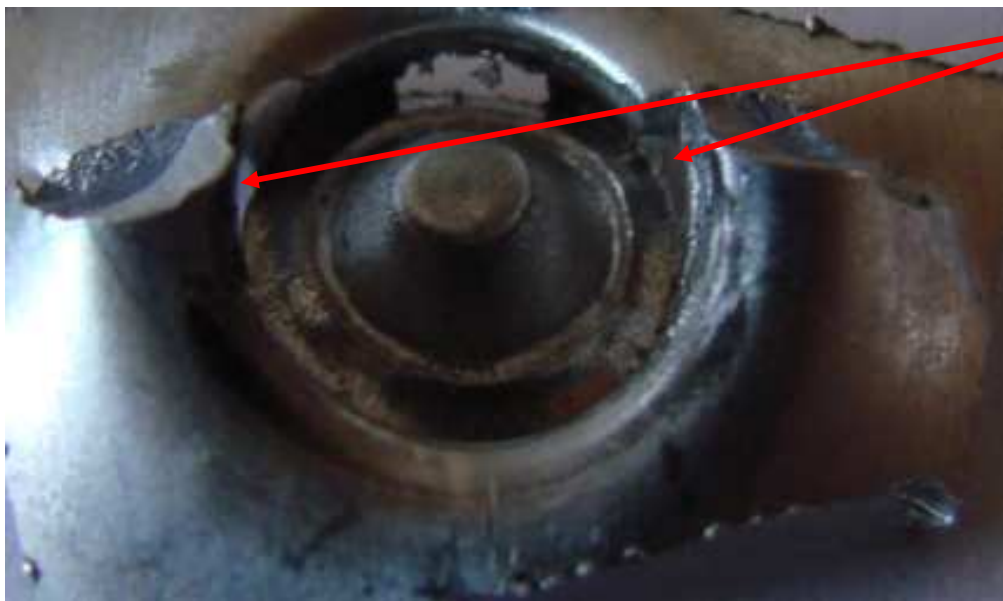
Emergence of fatigue cracks at the button hole of the (IF steel on top + Aluminium 5182 bottom) sample
